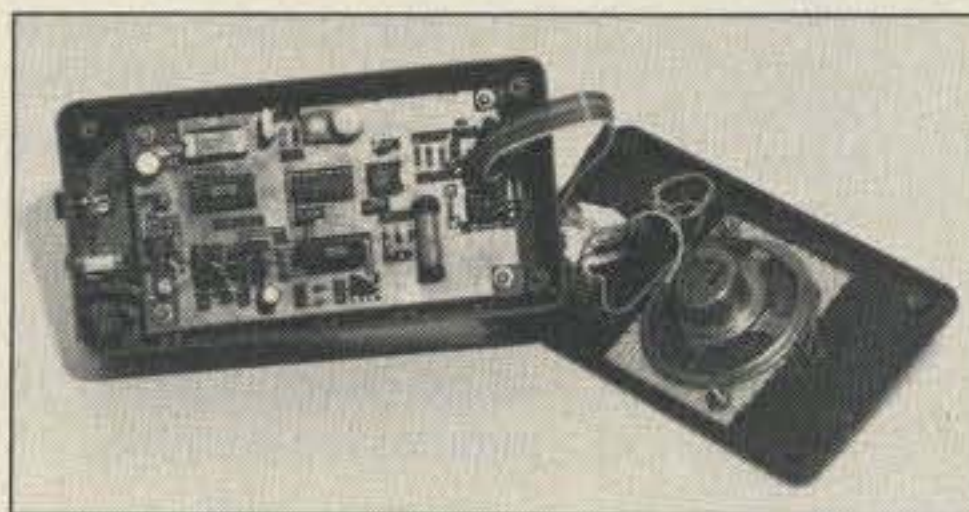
Photo A. Inside view of the completed decoder. The circuit board is on the bottom of the box. A ribbon cable connects the board to the speaker, LED, and switches on the front panel. Jacks for audio input, external speaker output, and power are mounted on the far end of the box. A piezo buzzer (see Figure 2) was not included in this version.
